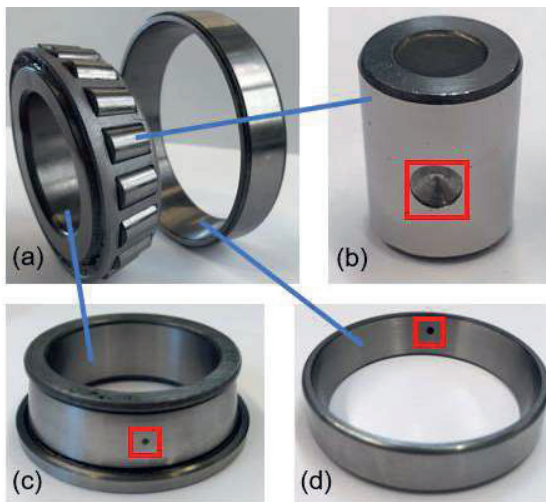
Entire tapered roller bearing (a) and its individual parts with the artificially induced damage to the rolling element (b), the inner race (c) and the outer race (d).
